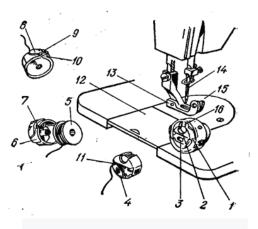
Tie the bottom thread on a 1022-M sewing machine
